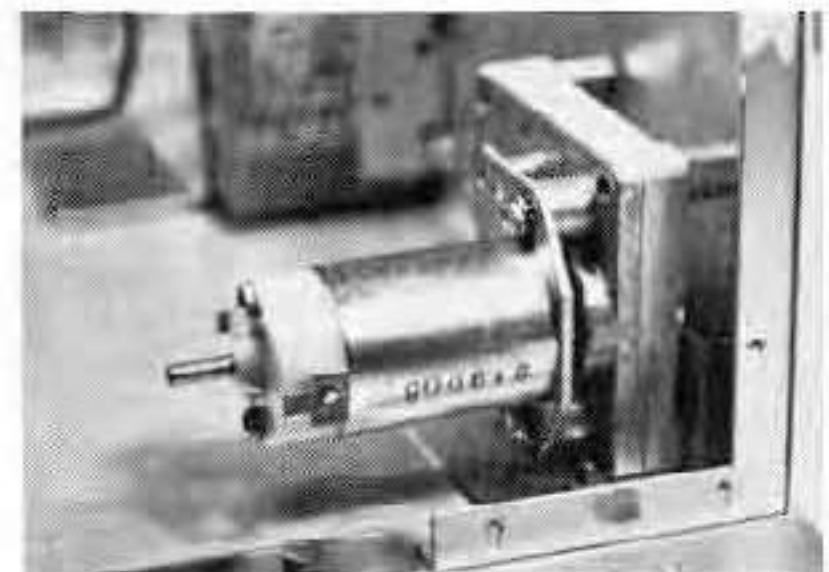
ONE OF THE TWO gear motors used to drive the mobility base's wheels.
